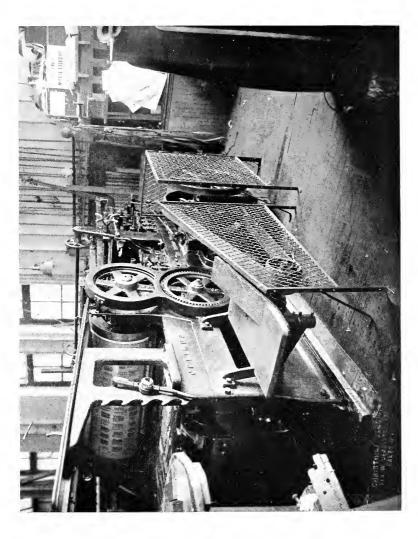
shows printing press with gears encased and with a wire mesh guard in front of the flywheel and belt.
